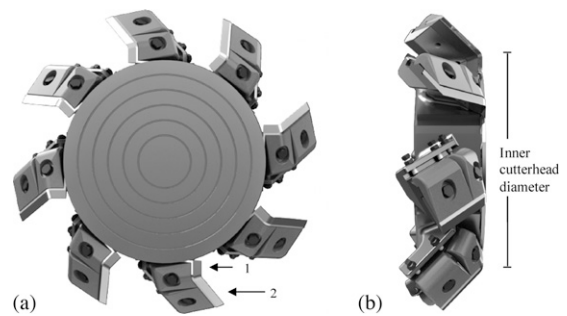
(a) Front and (b) side views of a conical-shaped cutterhead fitted with eight uniformly distributed knife holders, each with a bent knife and a knife clamp. The bent knife has two cutting edges that are joined at an angle; (a<sub>1</sub>) the shorter or canting edge smooths the cant and (a<sub>2</sub>) the longer or chipping edge severs a slice to produce chips (courtesy of DK-Spec Inc.).
